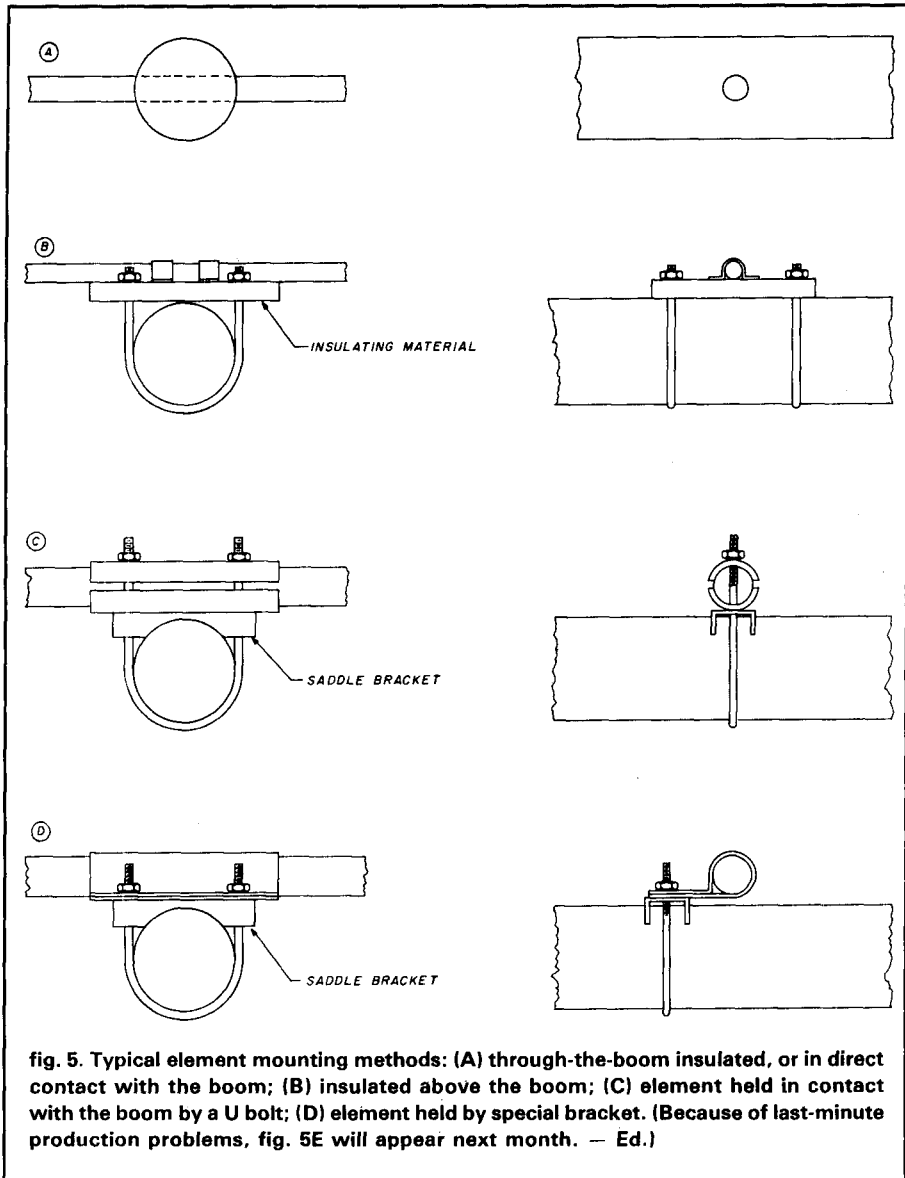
Typical element mounting methods: (A) through-the-boom insulated, or in direct contact with the boom; (B) insulated above the boom; (C) element held in contact with the boom by a U bolt; (D) element held by special bracket. (Because of last-minute production problems, fig. 5E will appear next month. — Ed.)
